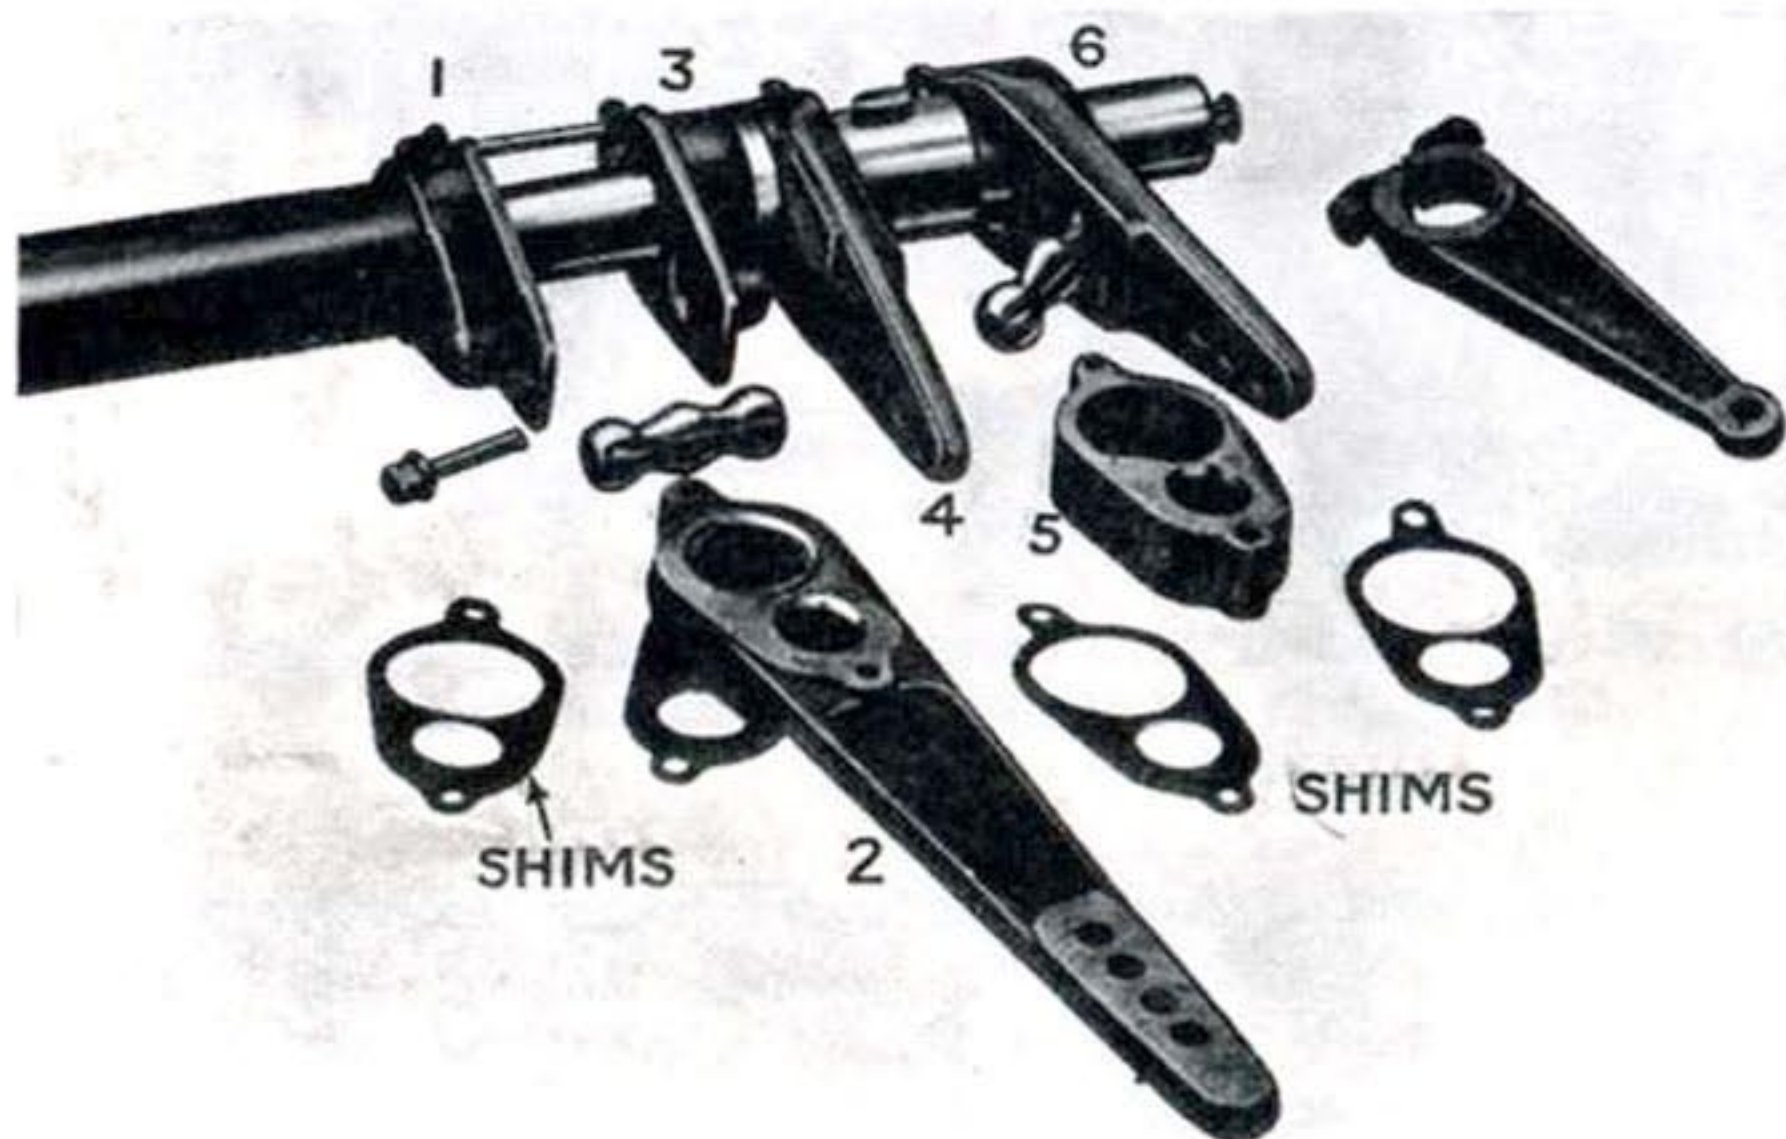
PRINCIPAL COMPONENTS OF THE BRAKE EQUALIZER
